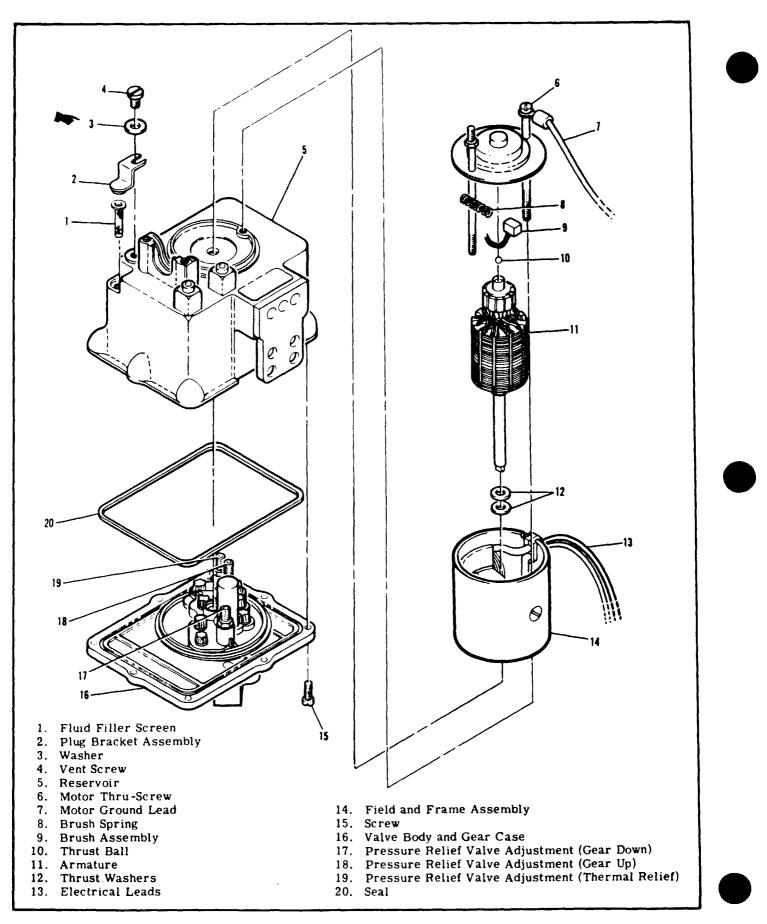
Power Pack Disassembly (Sheet 1 of 2)
